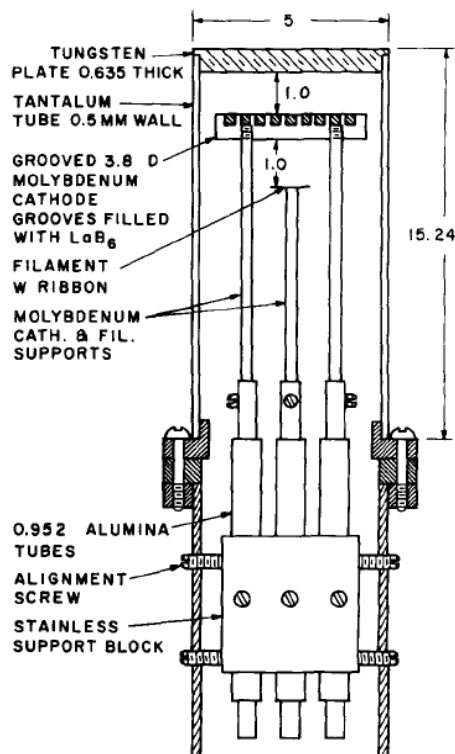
Schematic of electron bombardment ionizer (dimensions in cm) [1]
